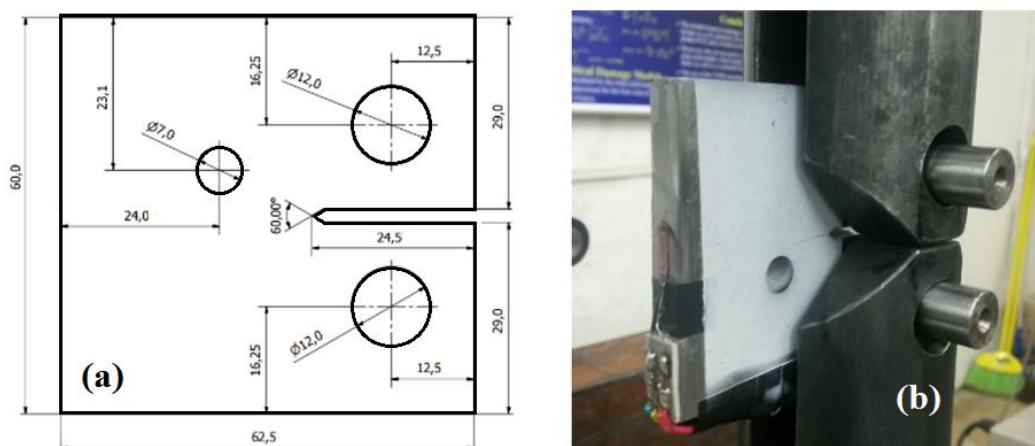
(a) Holed CT specimen; (b) Testing set up
